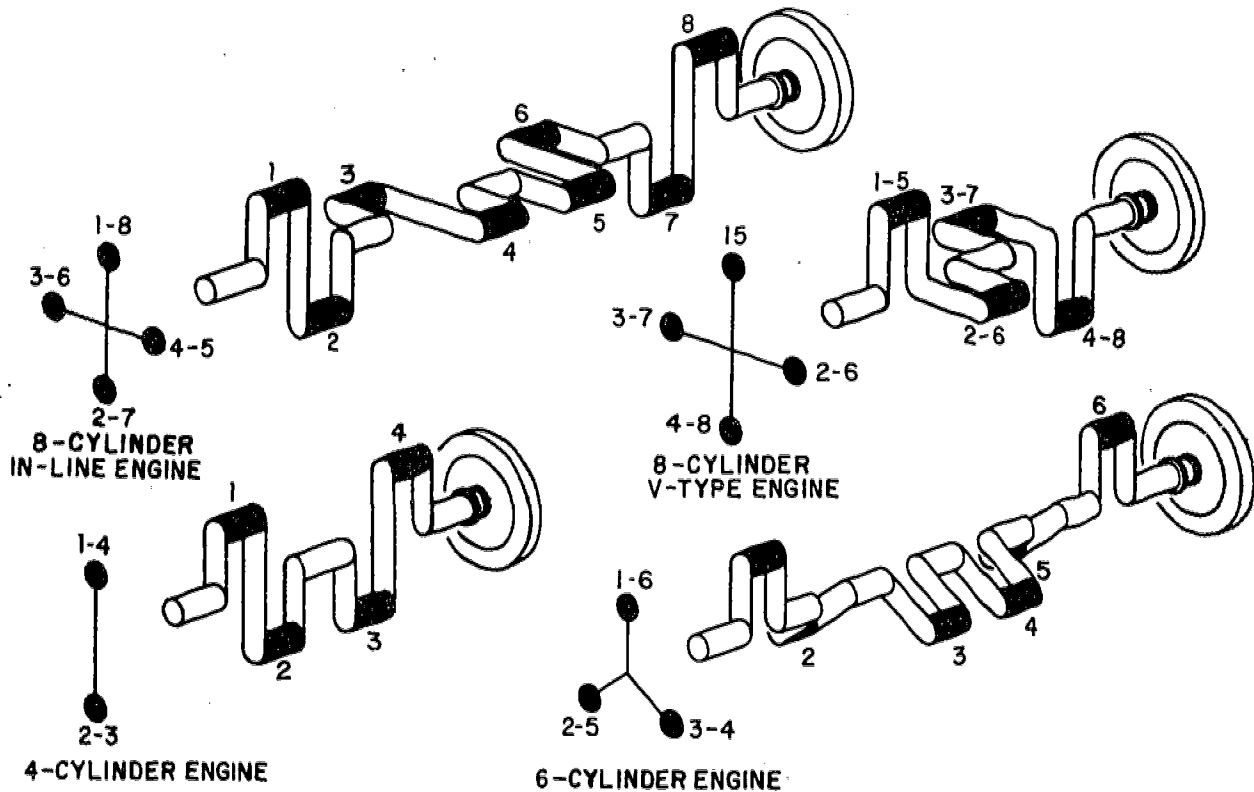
Crankshaft and throw arrangements commonly used.
